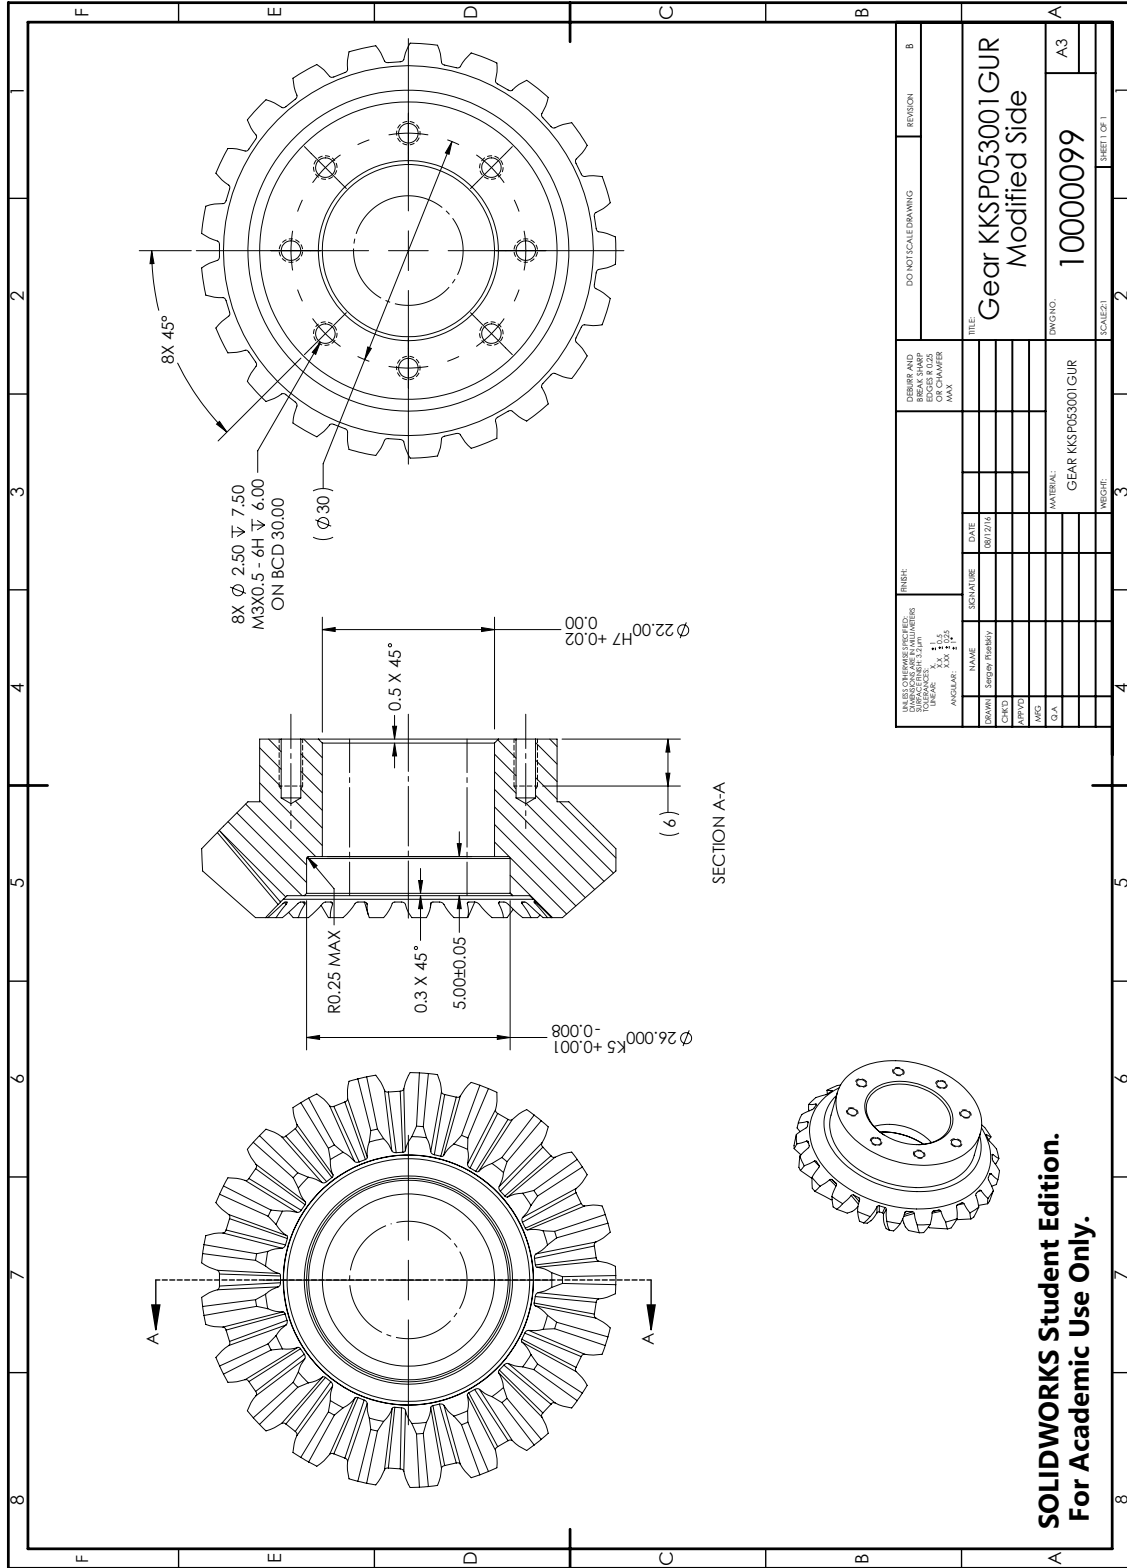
Drawing: Gear KKSP053001GUR modified, side.
